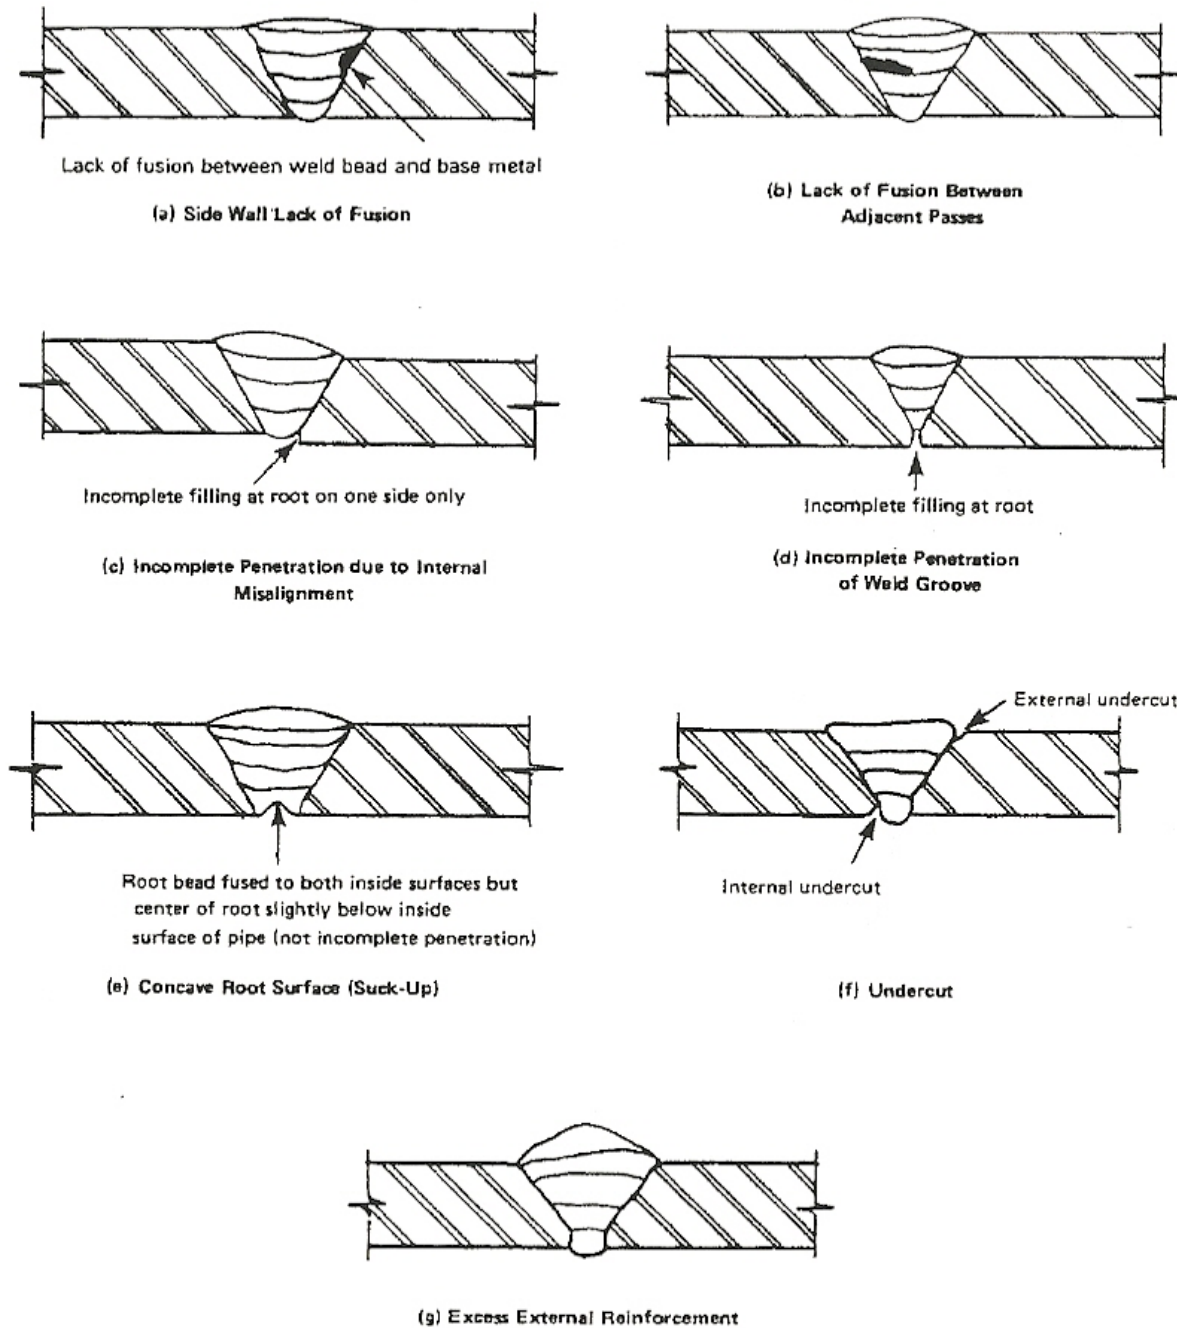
TYPICAL WELD IMPERFECTIONS
